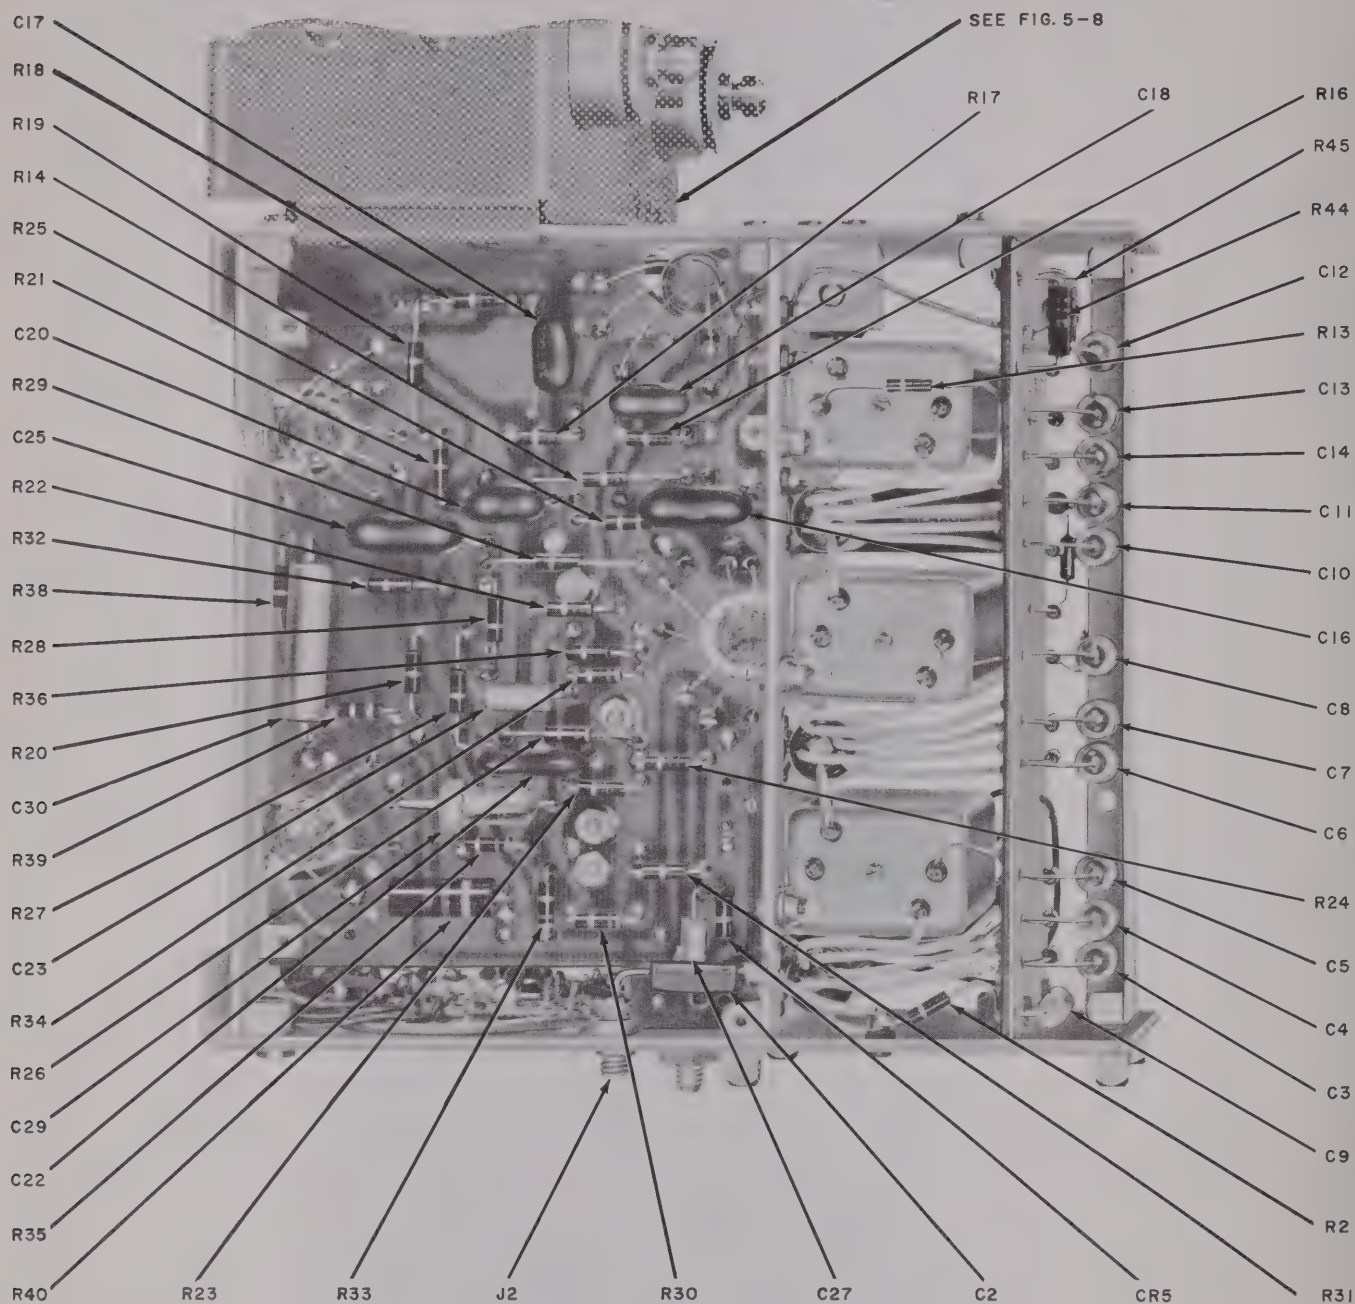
R-34A Receiver, I-f/A-f Assembly, Left Side View
